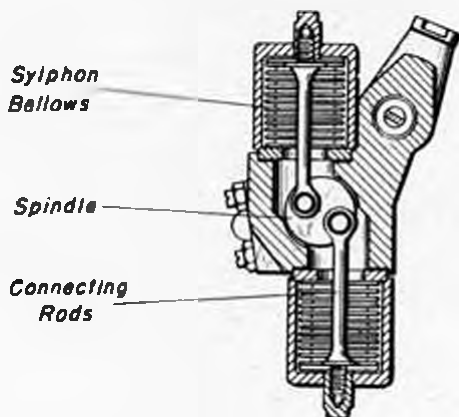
Squid Hydrodynamic Arming Mechanism, Sectional View
